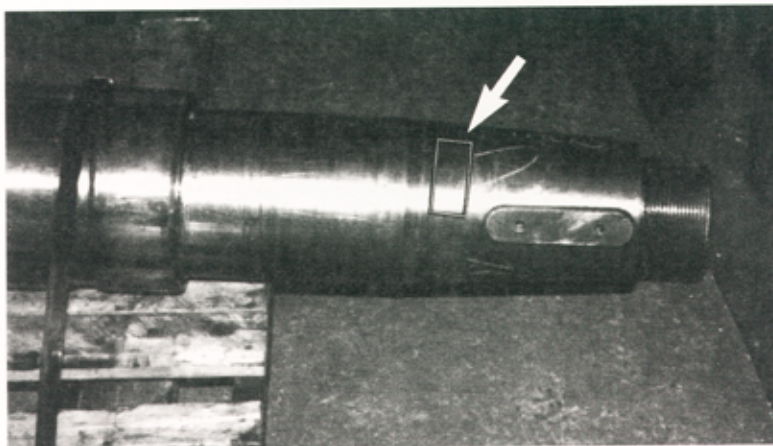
Fractured Shaft in the Pulverizer Mill
